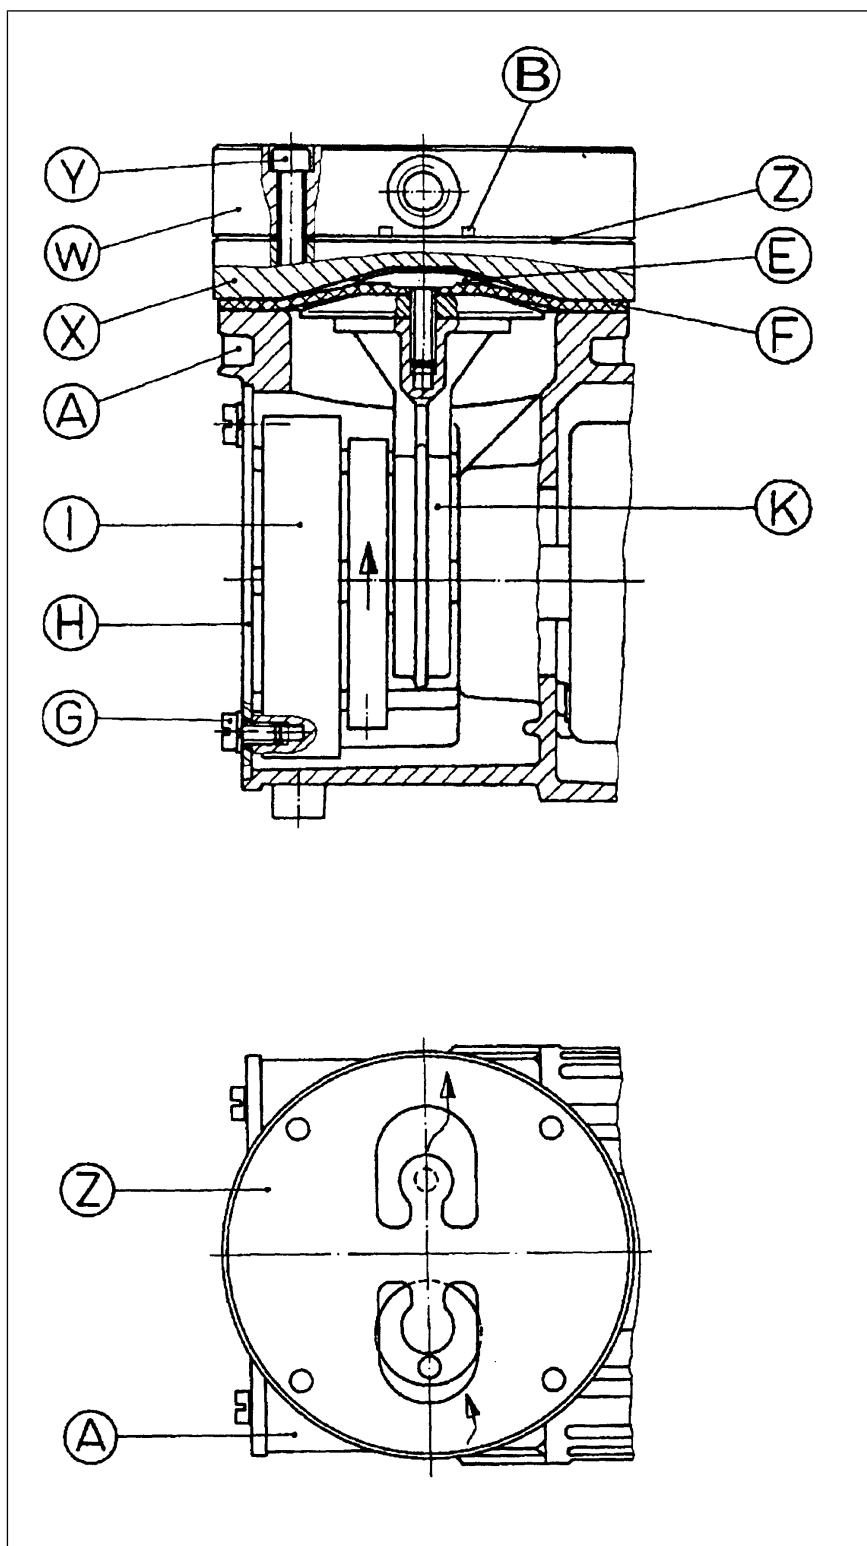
Pump parts for pump models with smooth heads and valve plate (elastomer, symbolic)
